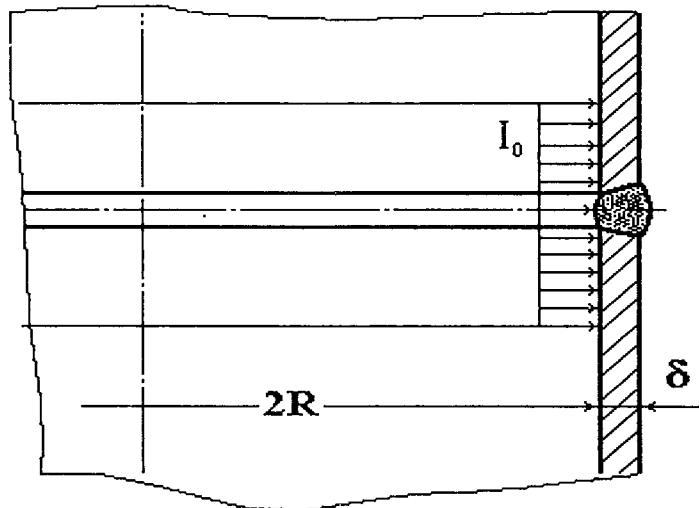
Principal scheme of explosion treatment of circumferential welds in axisymmetrical metal structures: R-shell radius; δ -shell wall thickness; I_0 -explosion pulse.
